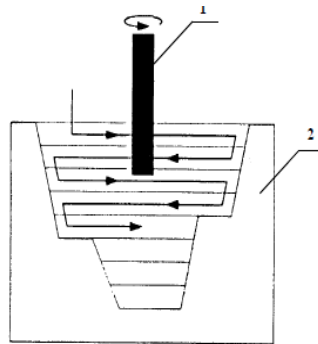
The general scheme of machining using an universal rotating electrode–tool.
